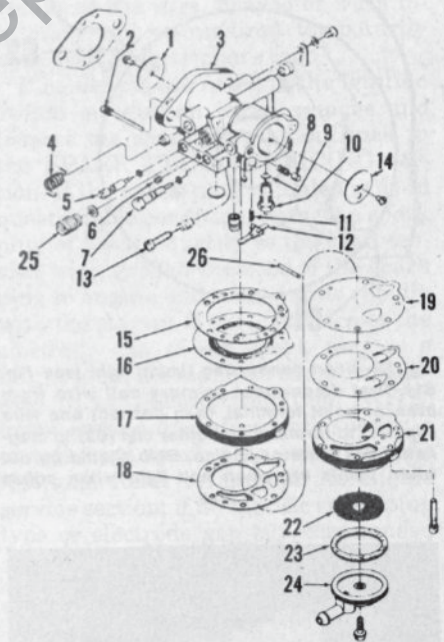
Exploded view of Tillotson Model HL carburetor. On some HL carburetors, pump diaphragm (19) and valves (20) are one-piece. Governor valve (25) is not used on all carburetors.
